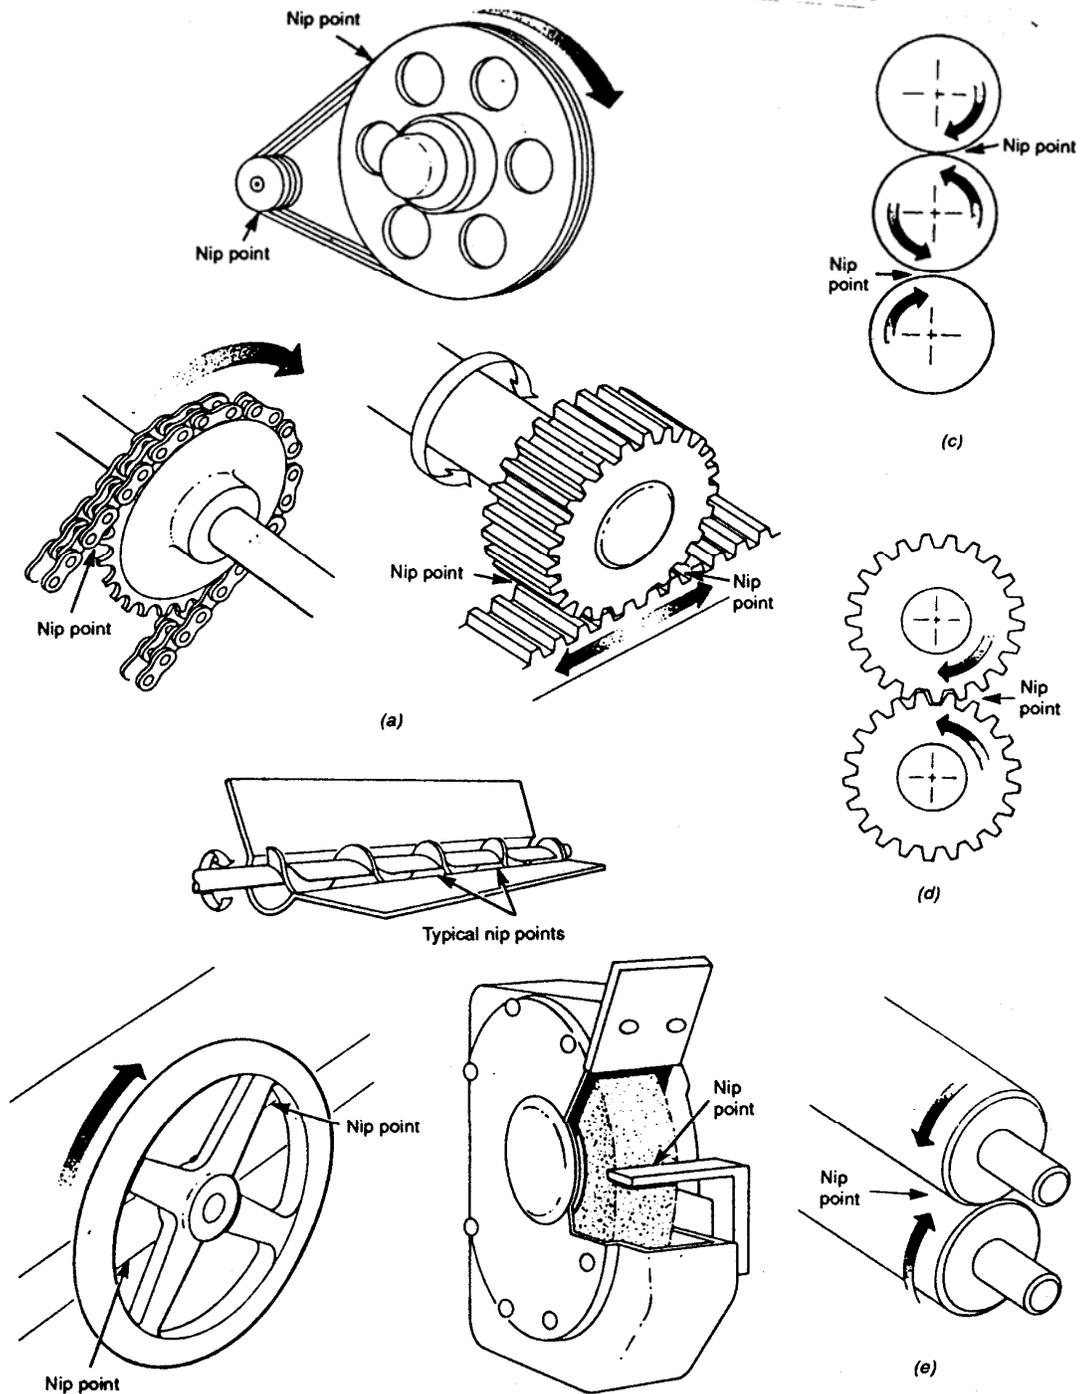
Examples of Nip or Pinch Points on Typical Machine Elements
